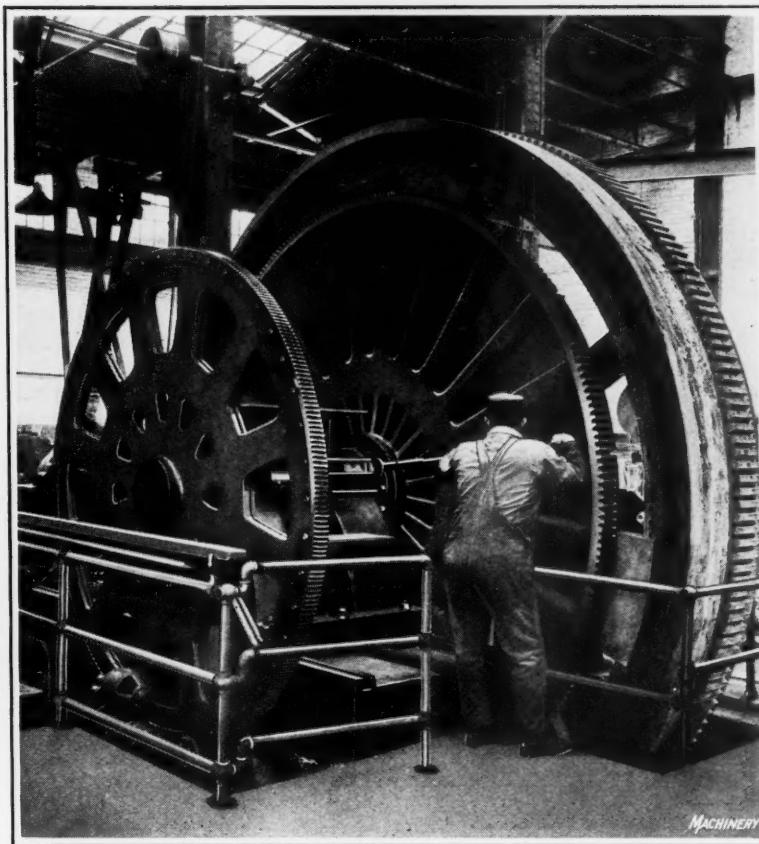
Rear View of the Planer shown in Fig. 2. Note Large Dividing Wheel at Left-hand End of Work-spindle
